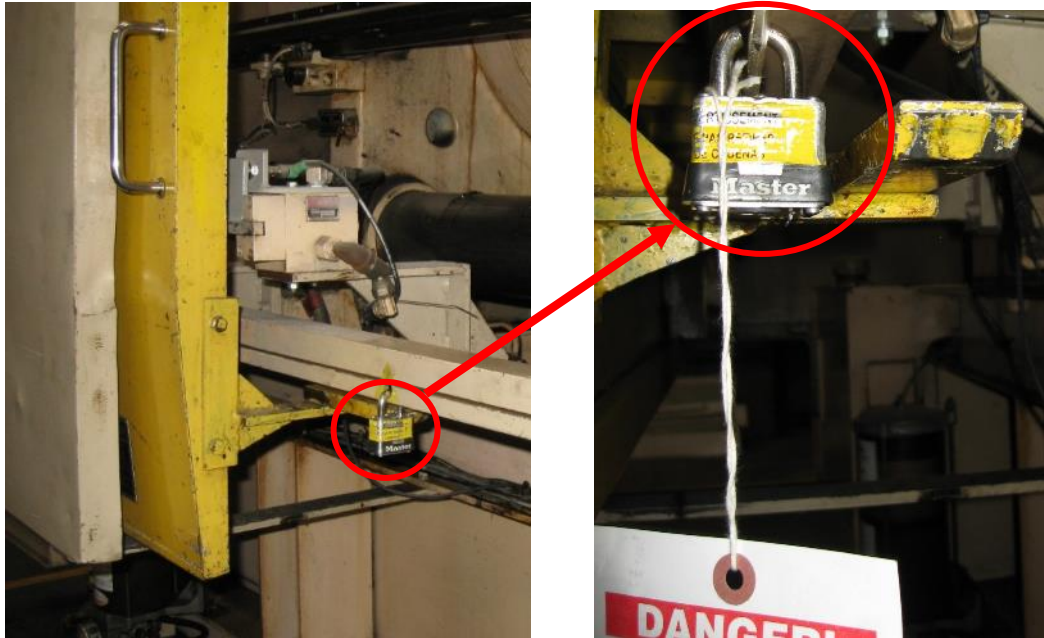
Partial lockout: the padlock blocks the operator’s guard on its rail.
